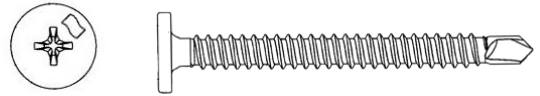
#10-16 PANCAKE HEAD TYPE 9 SCREW
